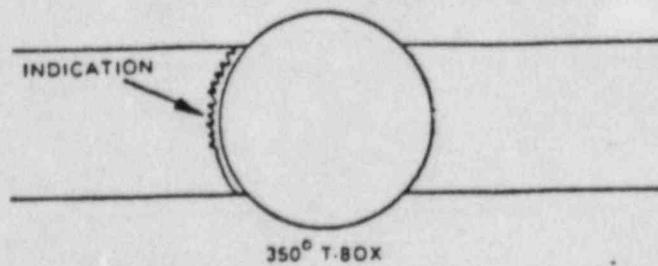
Elevation View of Cracked Core Spray Sparger
